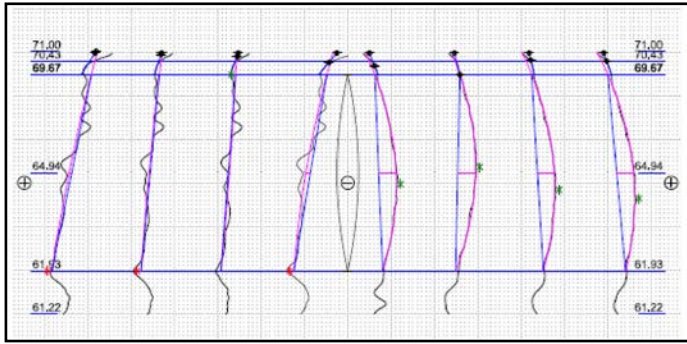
Gear flanks after testing; left flank is driven flank and right flank is the coast flank that has not seen any contact.
